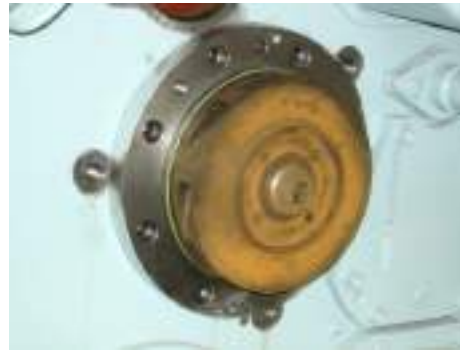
Assembly of C.W.Pump housing(청수 펌프 하우징 조립)
